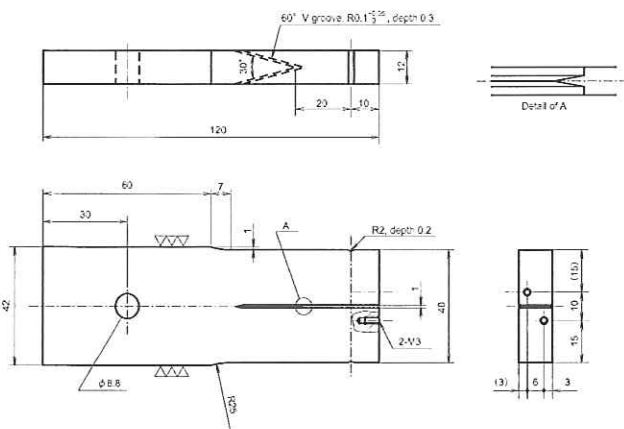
Shapes and dimensions of Mode II fatigue crack growth specimen⁶⁾
